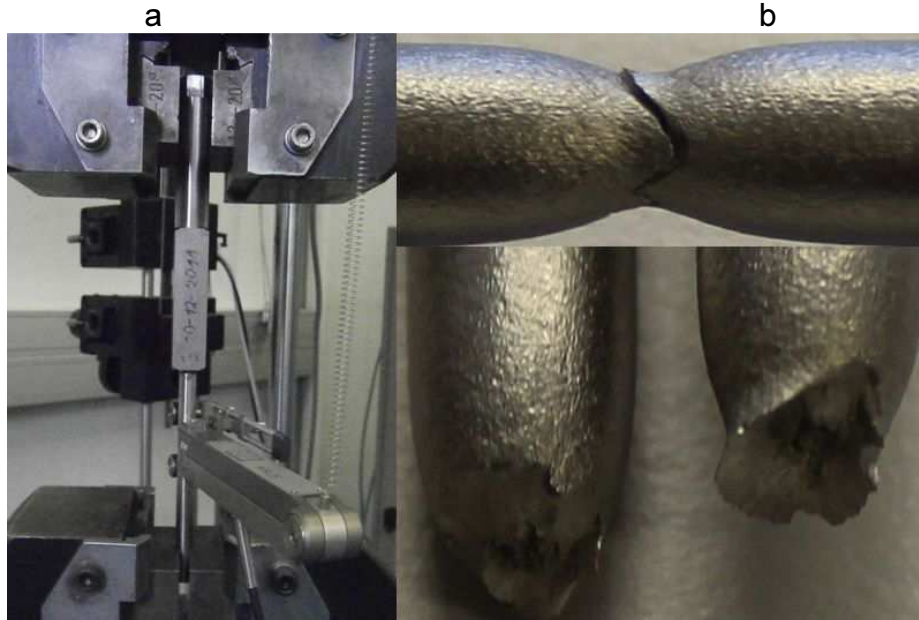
a) Sample A9.1 mounted in the clamps, b) magnified fracture zone
